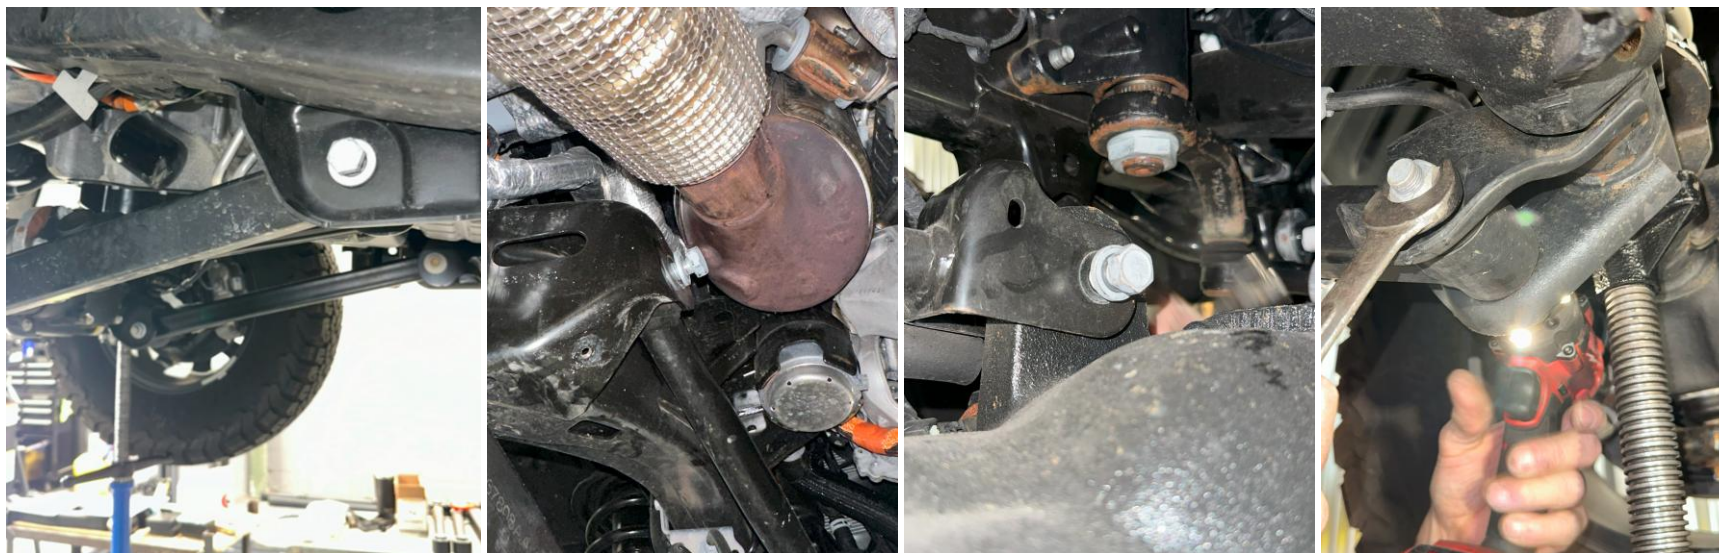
Lower/upper frame-side control arm bolts, and lower/upper axle-side control arm bolts
